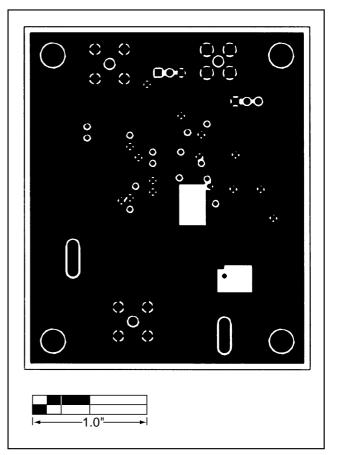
MAX2102 EV Kit PC Board Layout—Ground Plane
